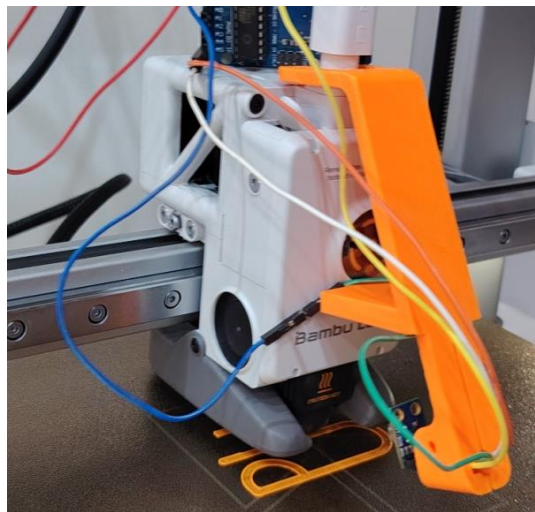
Experimental setup showing the infrared sensor rigidly mounted to the print head assembly in close proximity to the nozzle using a custom-designed 3D-printed holder.
